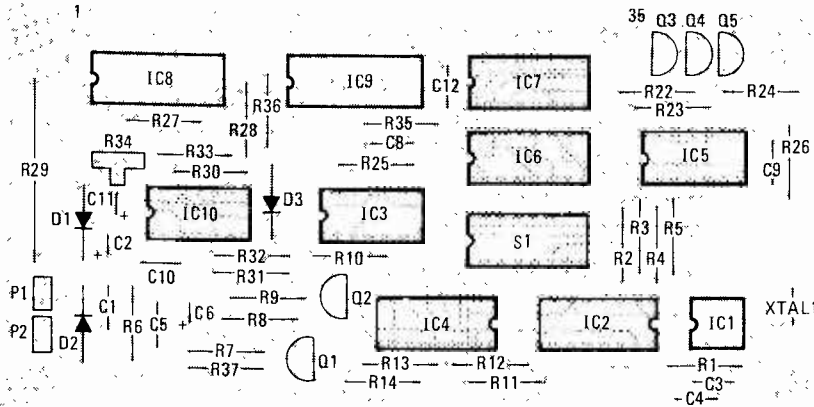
STUFF THE MAIN BOARD as shown here, and, after checking both boards for errors, connect them together with 35 pieces of short bare wire. The solder sides of the board should face each other.
